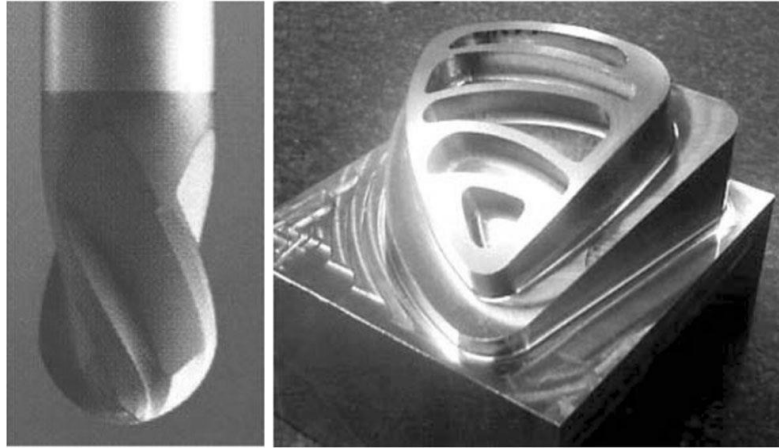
6mm Ball-end milling tool and part produced by high speed ball-end milling (Pratap & Patra, 2018)
